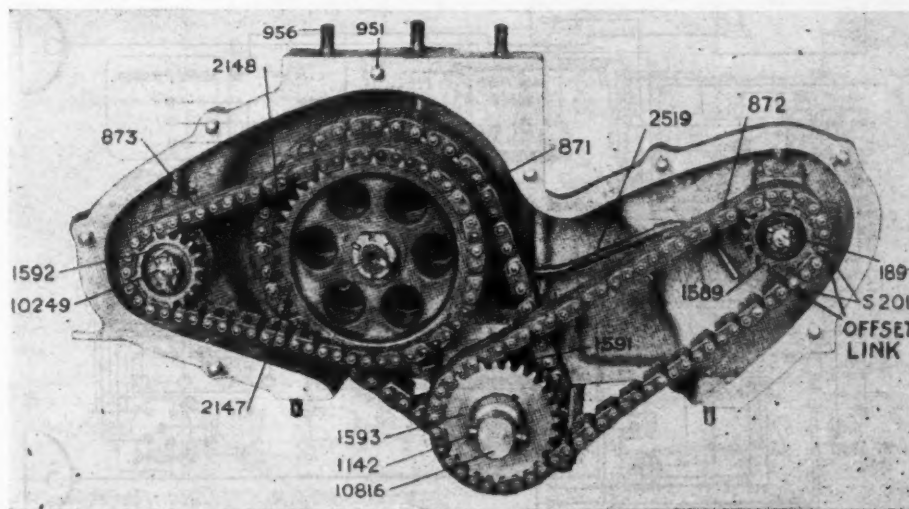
Showing the time shaft chains on the 1917 Chandler
